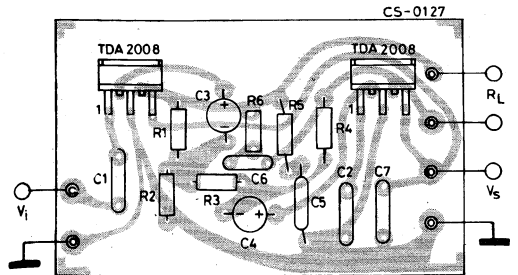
P.C. board and component layout for the circuit of fig. 3 (1:1 scale)
